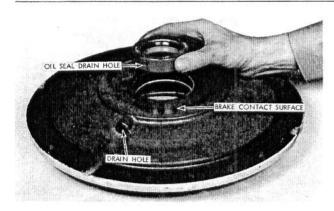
Inner Axle Shaft Oil Seal Installation
